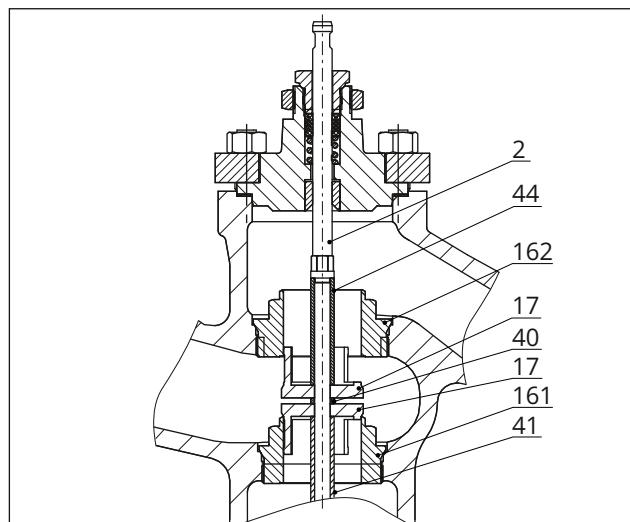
Valve in DN 32 and 50/NPS 3 and 4 · Mixing valve
